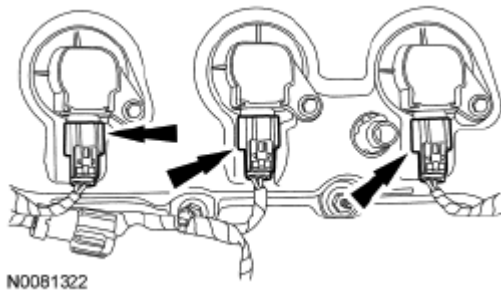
Locating RH Coil-On-Plug Electrical Connectors
